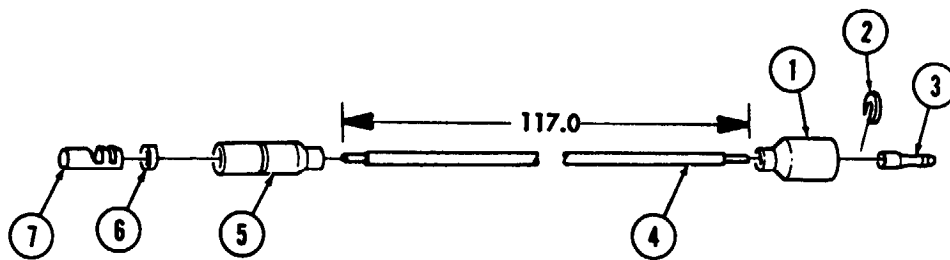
Wire "G" - Passenger Side Siren Switch Adapter Connector "E"
